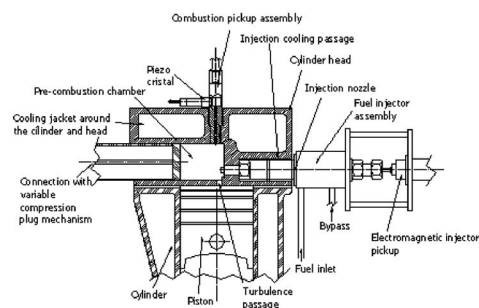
CFR F-5 Diesel combustion chamber assembly.
